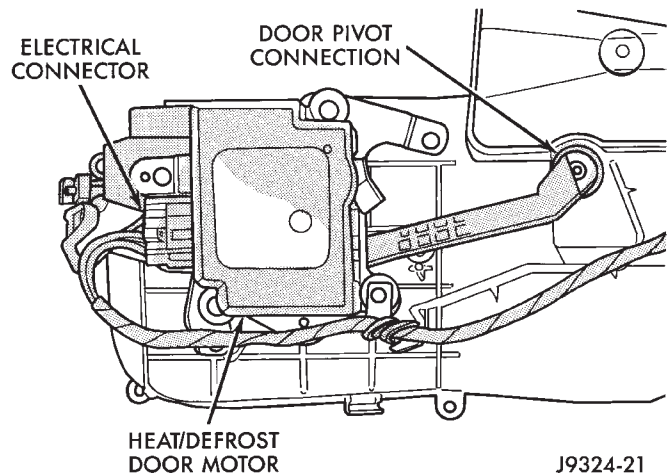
Heat/Defrost - Panel/Defrost Door Motor
